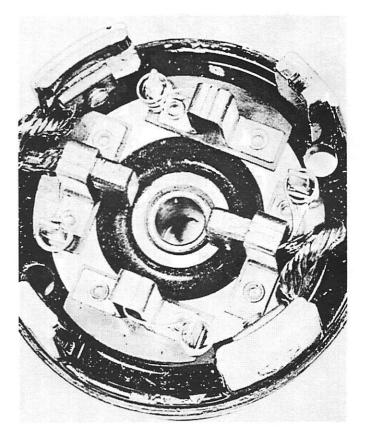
Commutator End Plate Assembly with Springs and Brushes in Place
